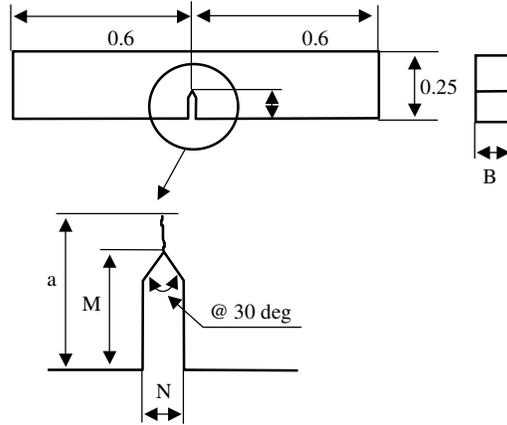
Specimen geometry and dimensions of the SENB fracture toughness specimens.
